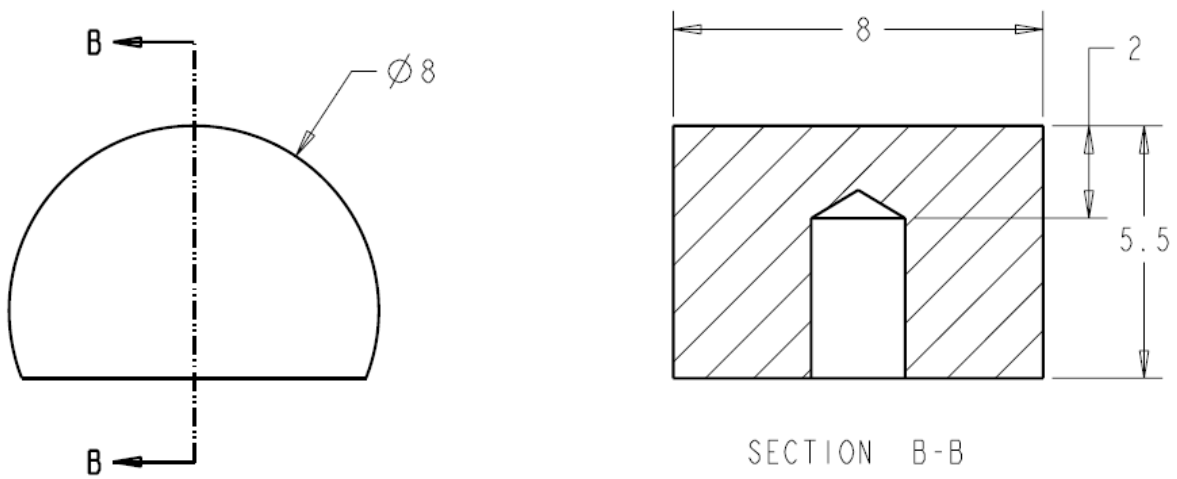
52100 Steel cylindrical pin dimensions in millimeters (machined from wrist pin)
